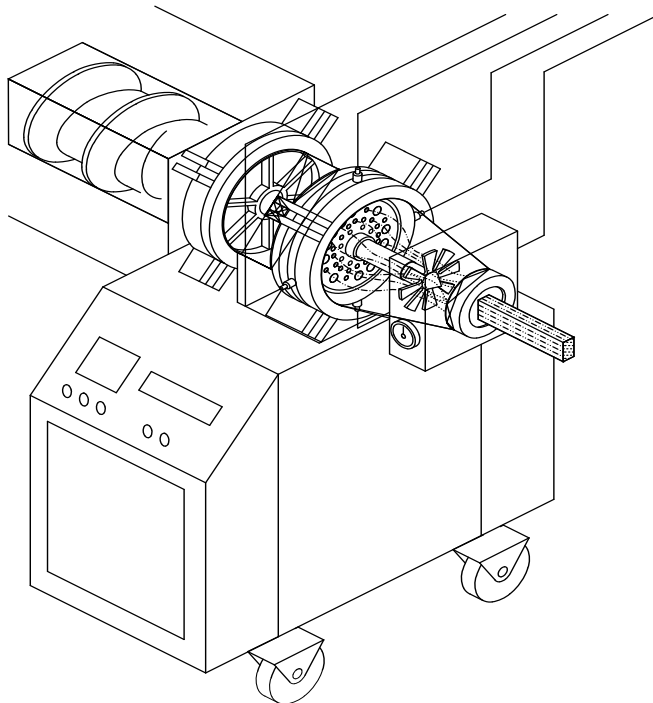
Solid–liquid system marbleizing and striping group assembly.
